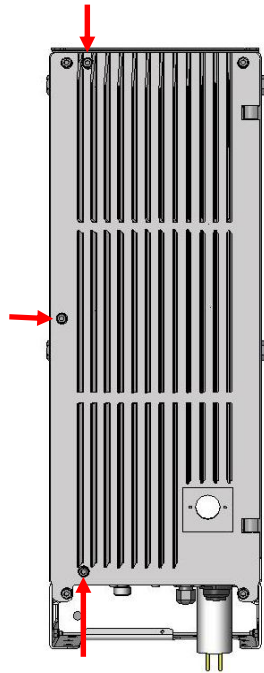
(g): after removing the external cover, loosen the three screws
